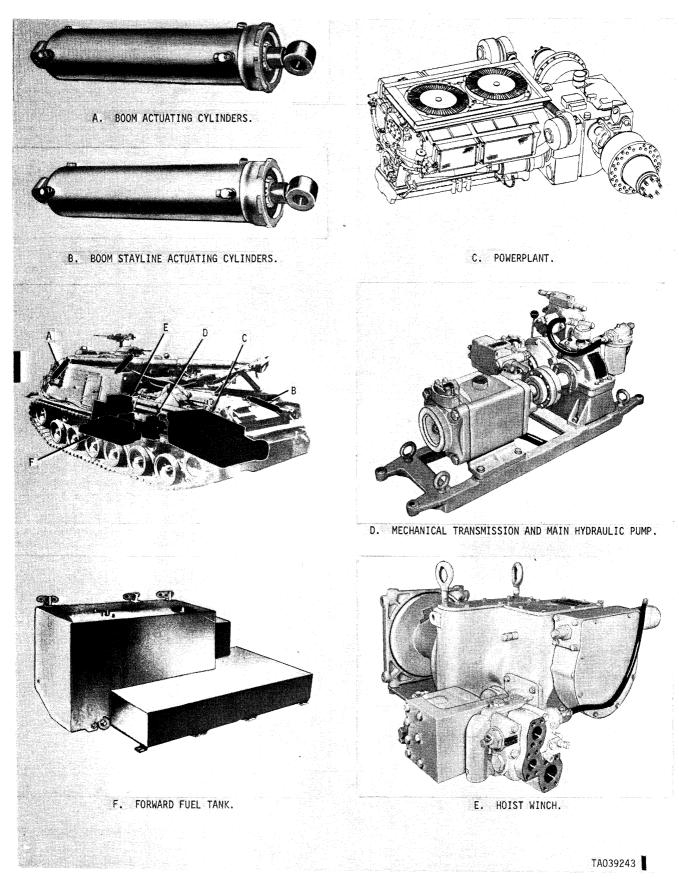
Location of major components, assemblies and auxiliaries (Sheet 1 of 7).
